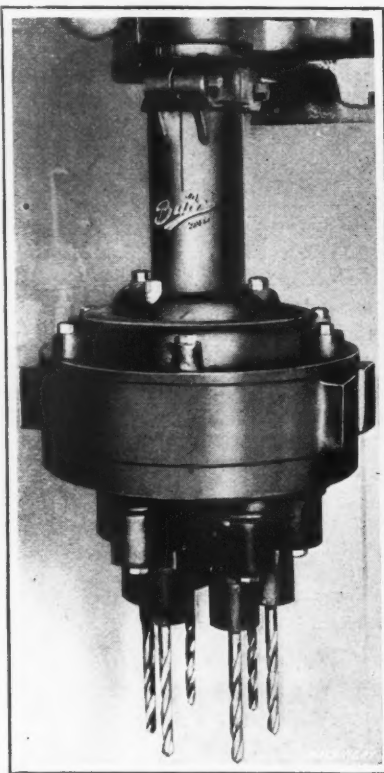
Multiple-spindle Drill Head made by Nelson Blanck Mfg. Co.
